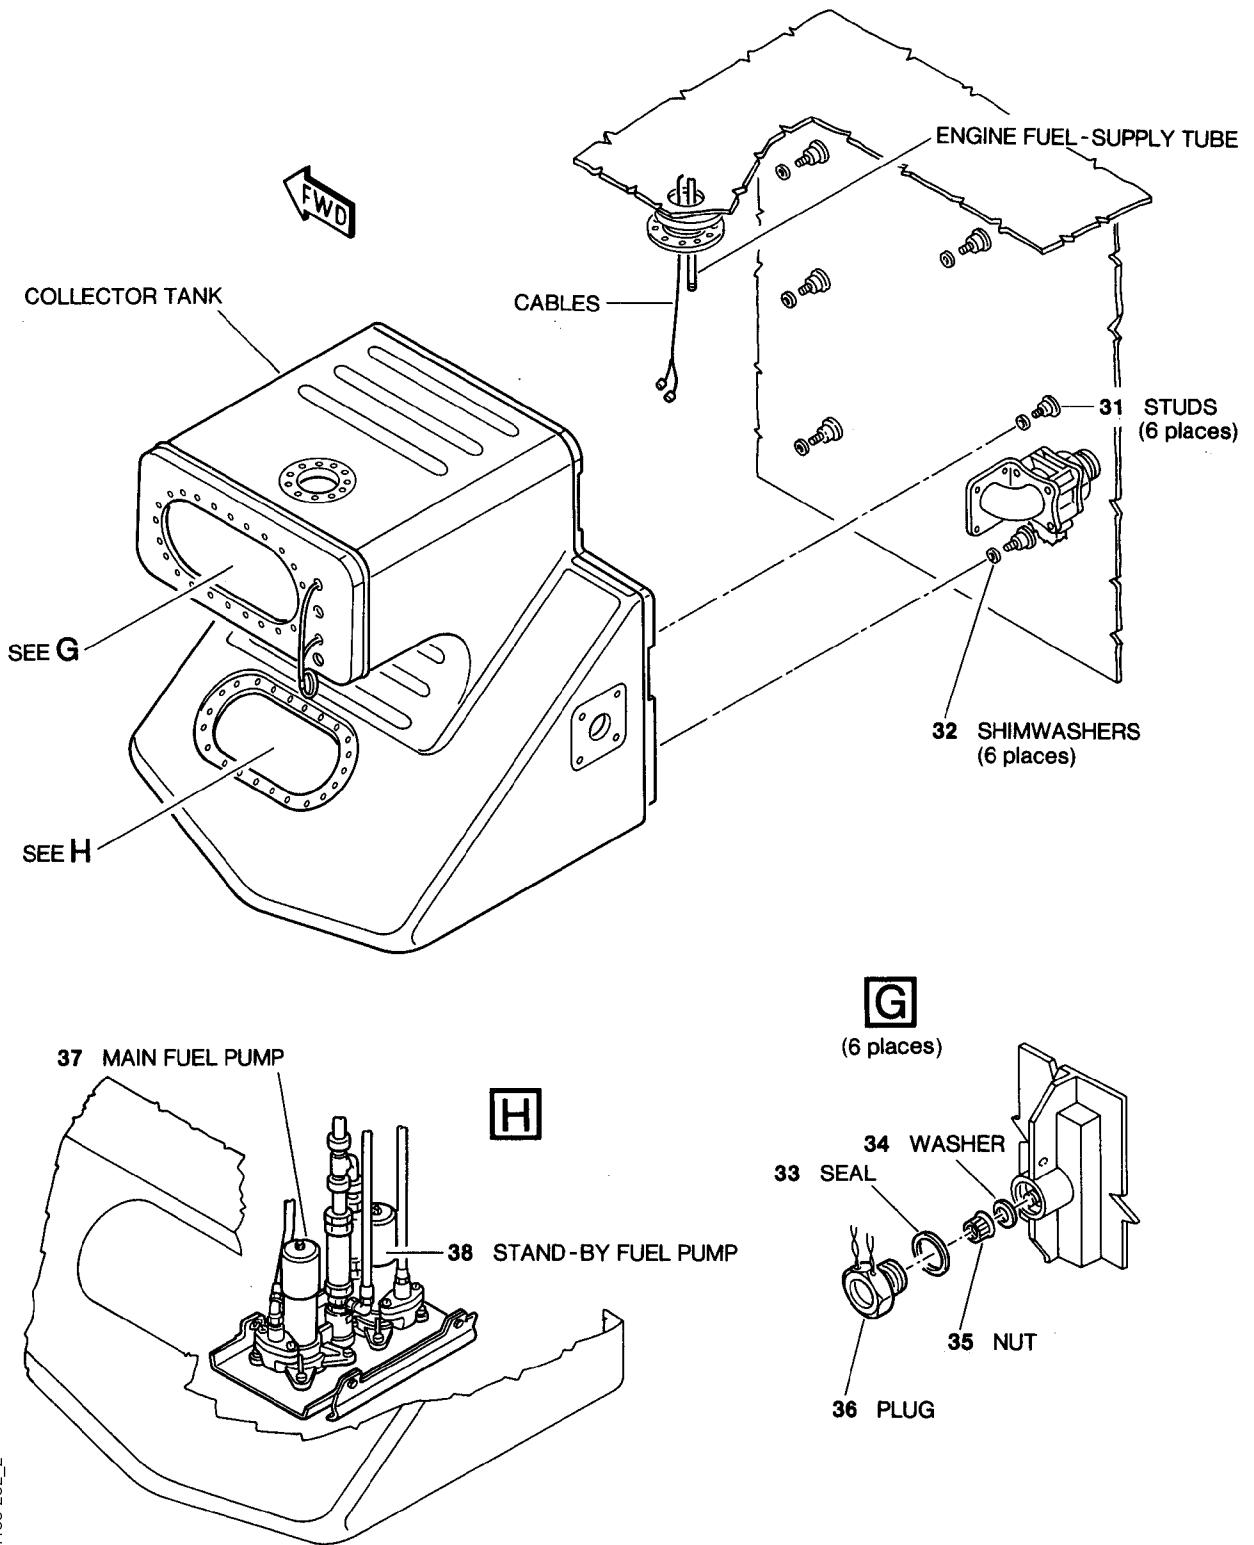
(Sheet 2) - LH Fuel Collector Tank - Removal/Installation
